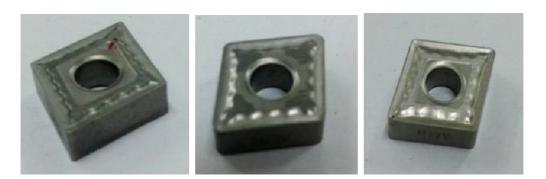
Cutting tool-inserts (1.2mm, 0.8mm, 0.4mm)
